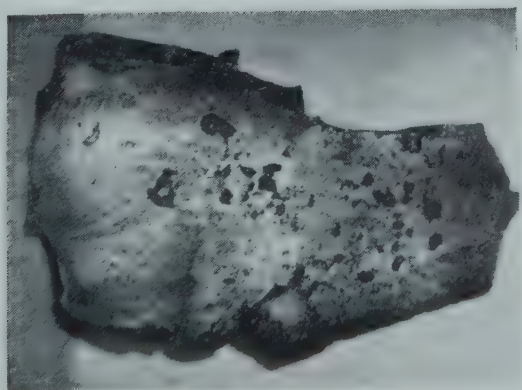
Insulating Holding Jacket Plate Showing Extensive Corrosion and Pitting [Reduced to $\frac{3}{8}$ th size]
